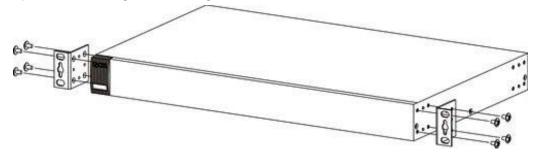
Attaching the Mounting Brackets (GS1100-24)
